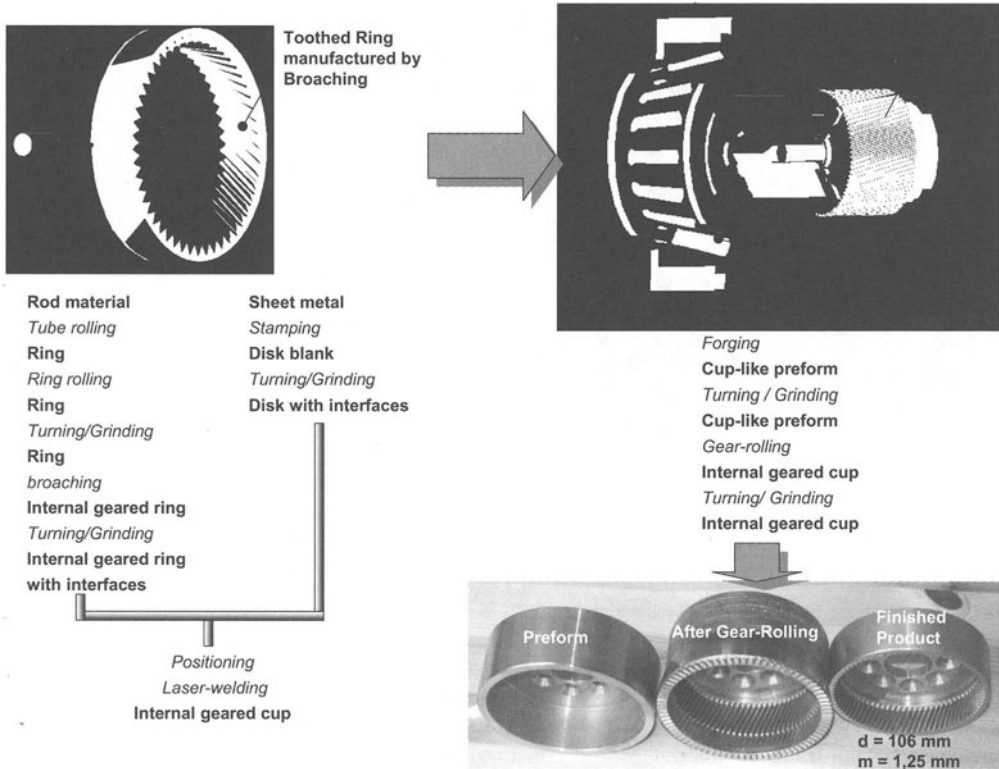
Conventional process chain to manufacture internal geared wheels (left) in comparison to internal gear rolling, manufactured parts (right, bottom)
